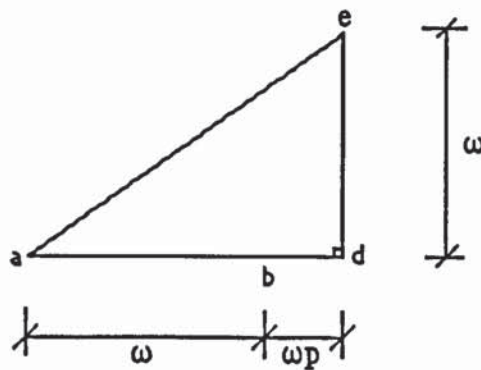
The idealised unequal weld leg length weld $abde$.
